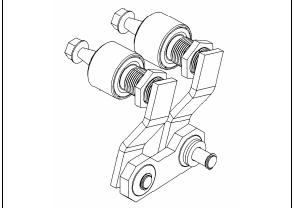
DRIVING MECHANISM (DRIVER SIDE) 23284
